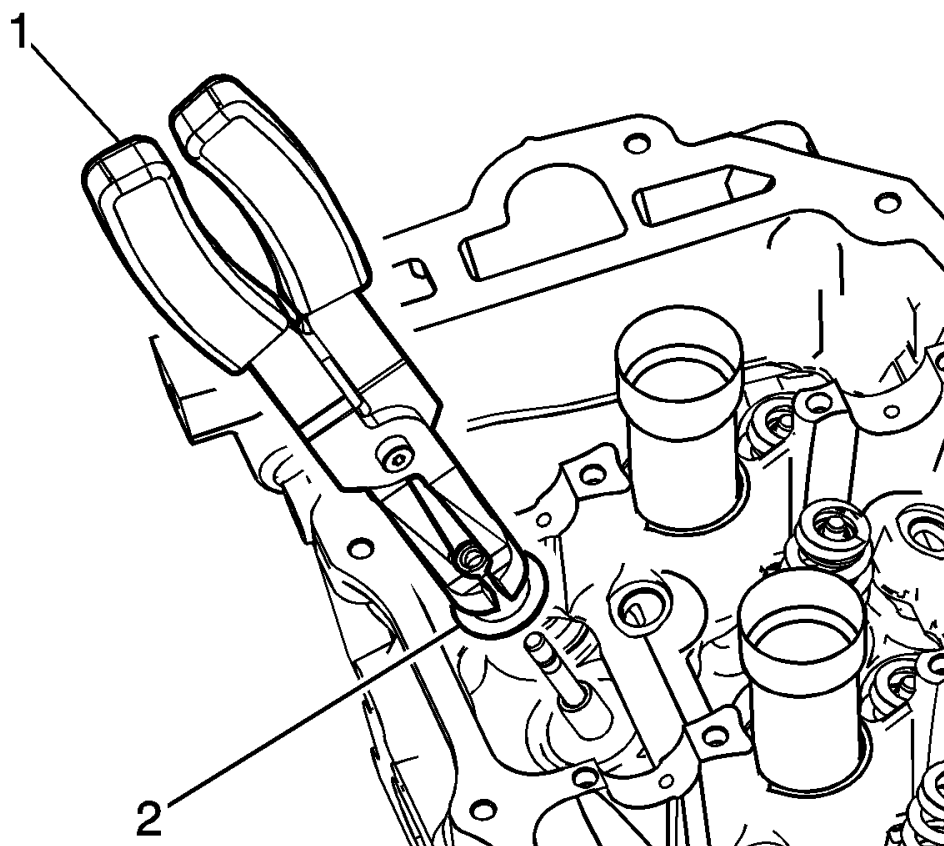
Identifying Special Tool - EN-46116 & Valve Stem Seal
